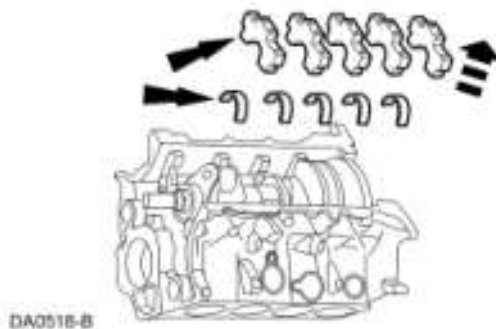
Locating Main Bearing Caps, Lower Crankshaft Main Bearings And Lower Thrust Washer
